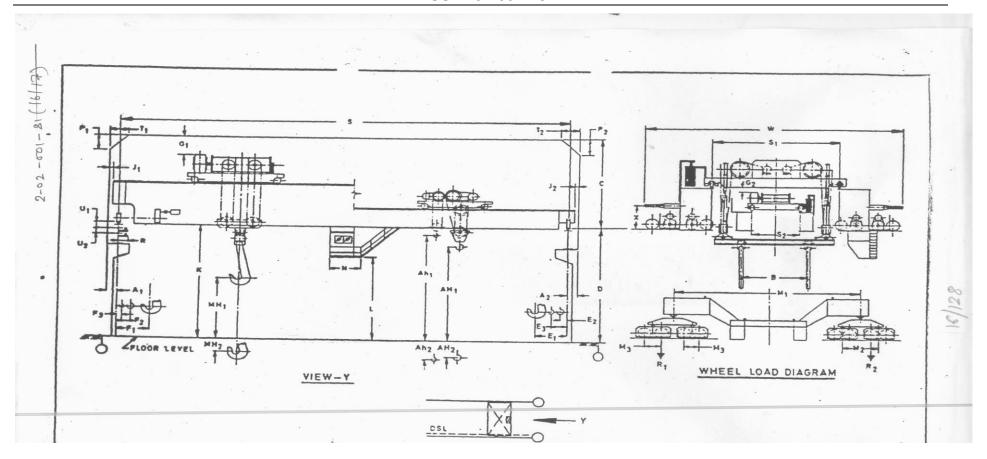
TYPICAL CLEARANCE DIAGRAM AND LIMITING DIMENSIONS OF FOUR GIRDER EOT CRANES
